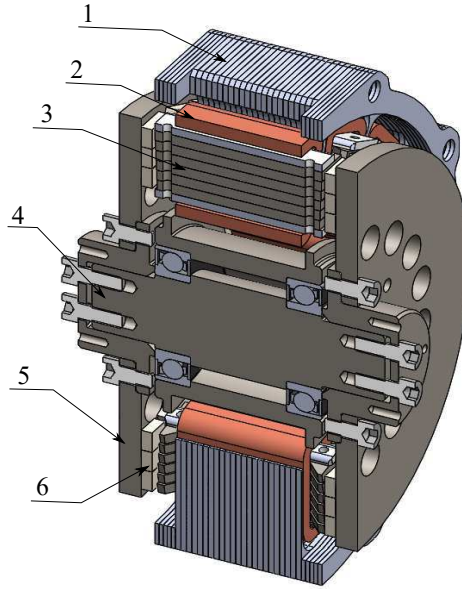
Cross-section view of the non-integrated YASA machine: (1) Housing, (2) Winding, (3) Core, (4) Shaft, (5) Rotor Disc, (6) PMs.
